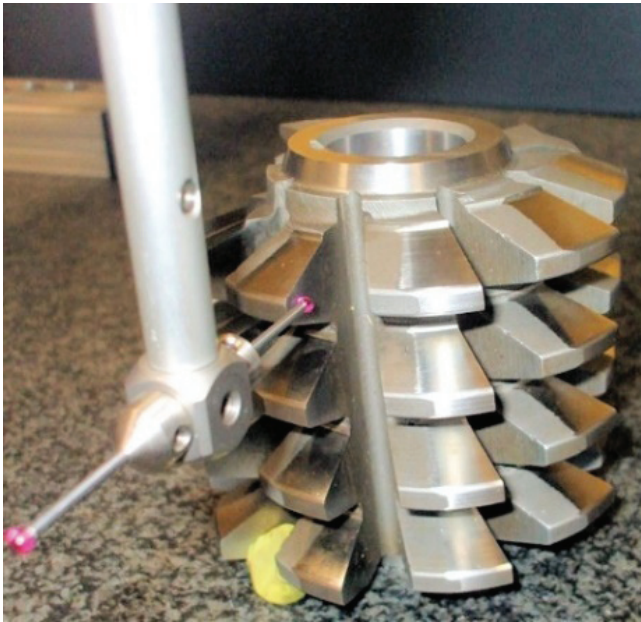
Measurement of rake surface on CMM Zeiss Eclipse 700 with ST3 measuring head
